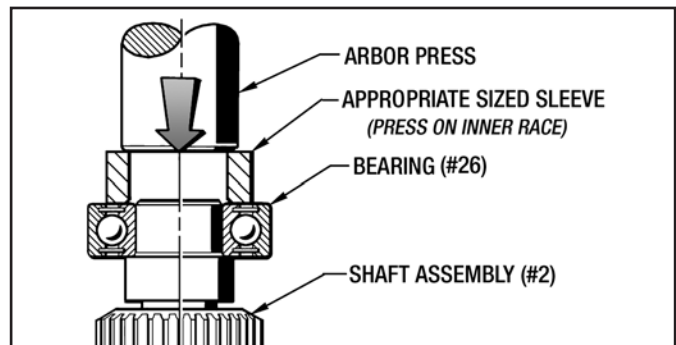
Installing Bearing (#26) in a Motor Brake
